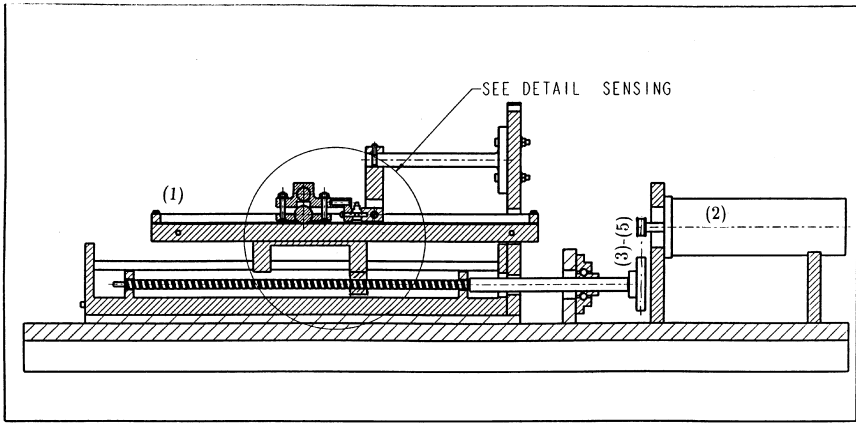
Cross-sectional view of linear-motion friction measurement apparatus (from Bearing and Lubrication Laboratory Department of Mechanical Engineering, New Jersey Institute of Technology).
